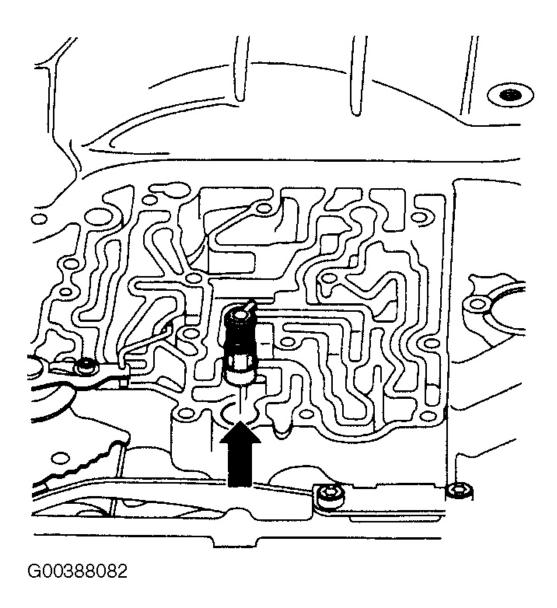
Locating Valve Body Sealing Plug Courtesy of VOLKSWAGEN UNITED STATES, INC.
